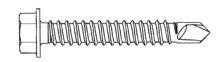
#12-14 HEX WASHER HEAD TYPE 4 SCREW
